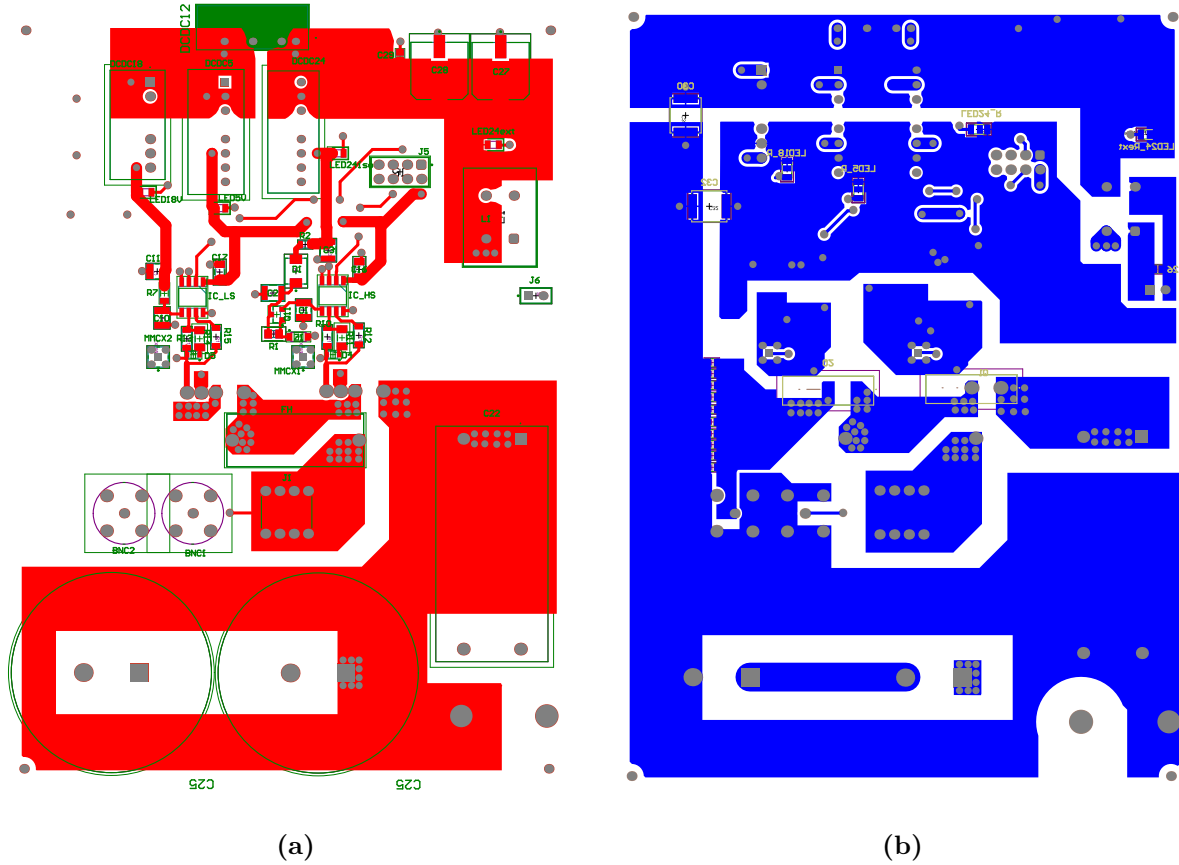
PCB with a conventional design strategy: a) top side b) bottom side.
